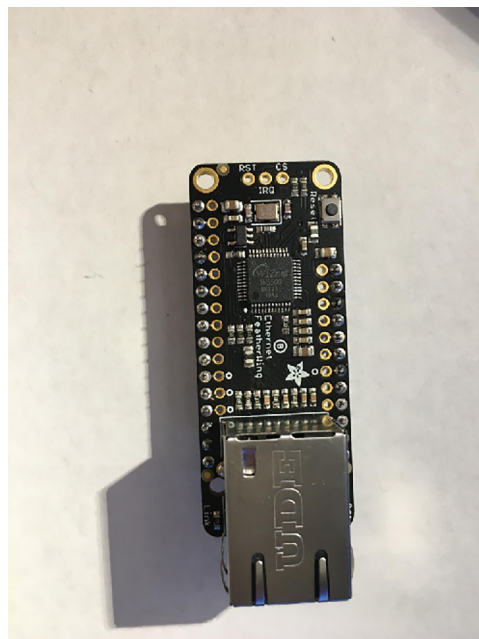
Top view after soldering the male headers on the Ethernet Connector.
